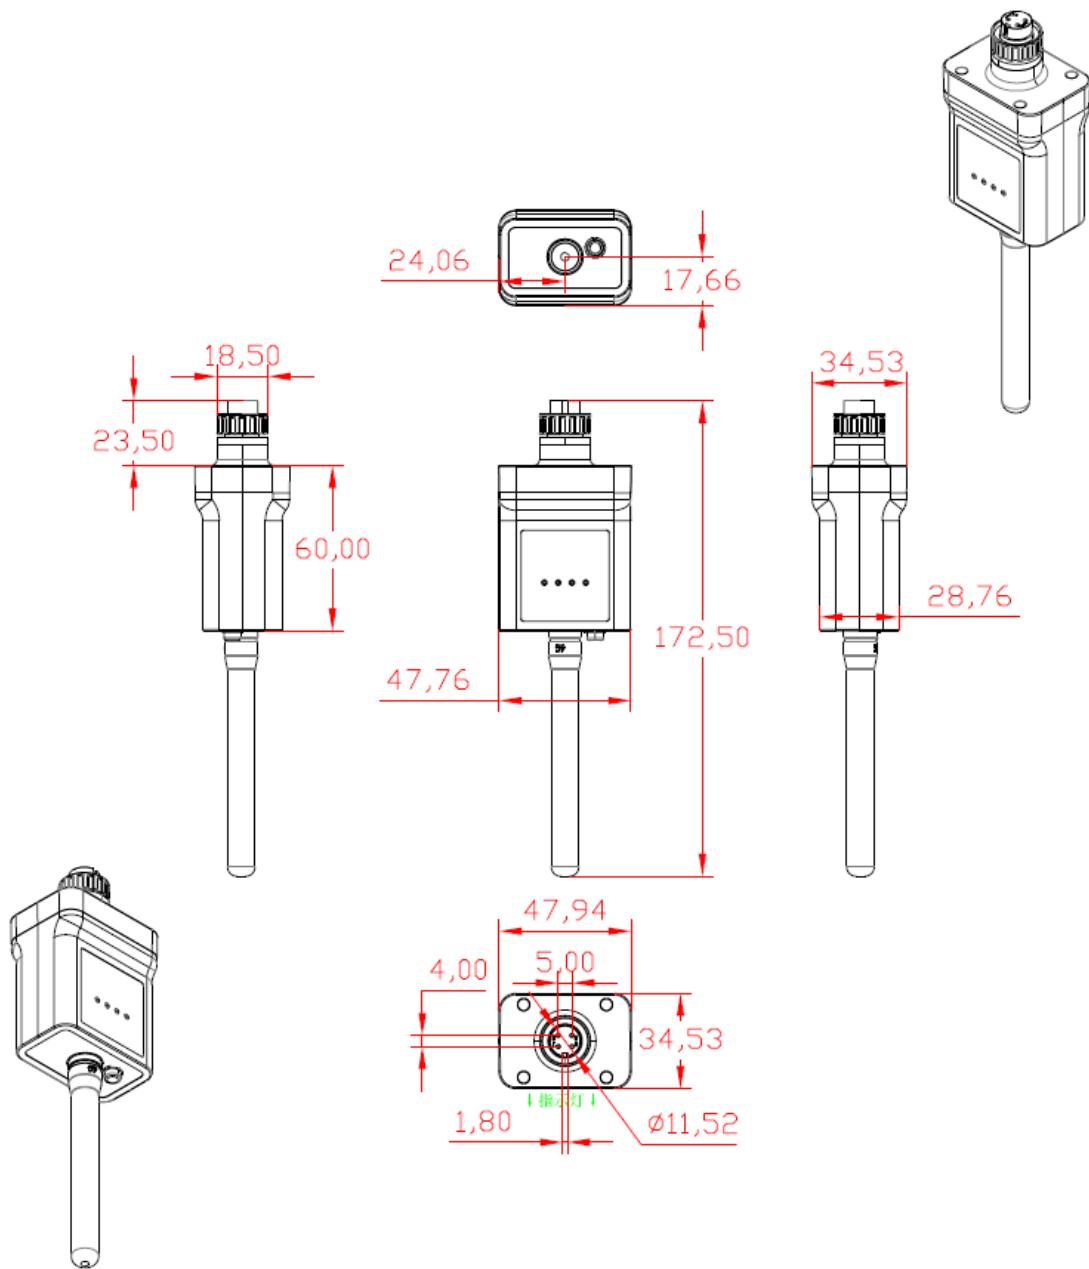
Solar Plug-SGB1-09/-10/-12/-26 Mechanical Dimensions
